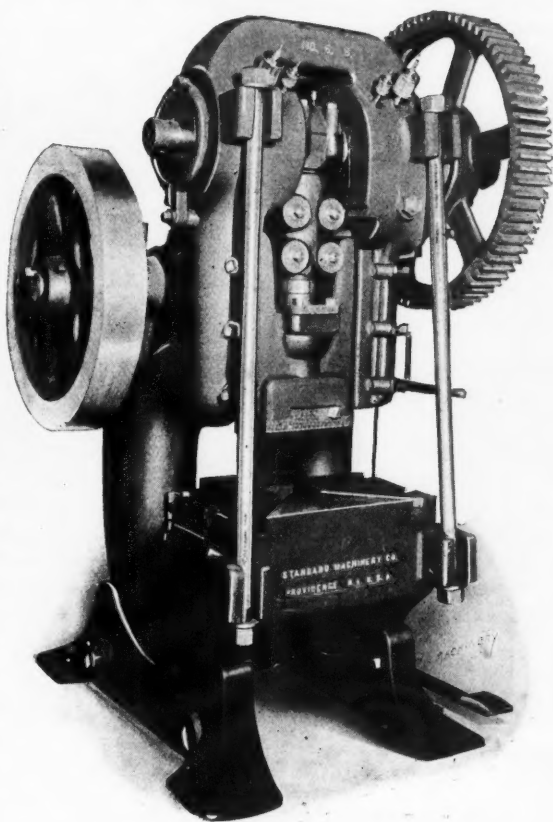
Heavy Back-geared Press built by Standard Machinery Co
